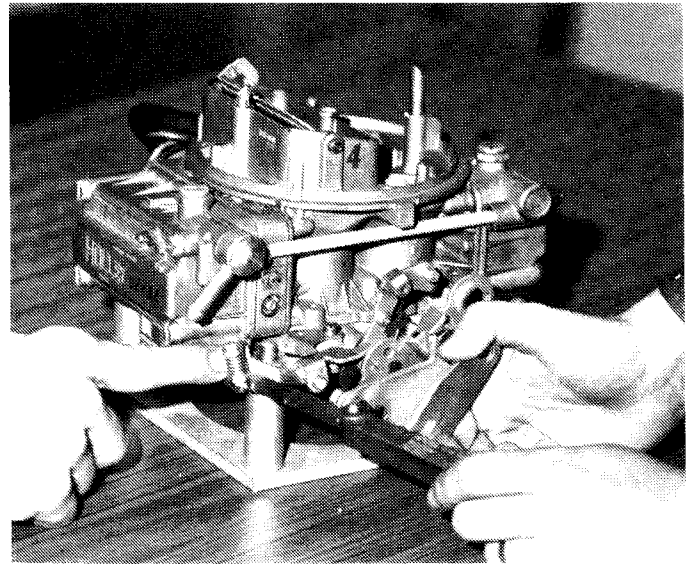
Hold throttle lever at wide open throttle and check with .015" feeler gauge between the pump operating lever override screw and the diaphragm operating lever.
